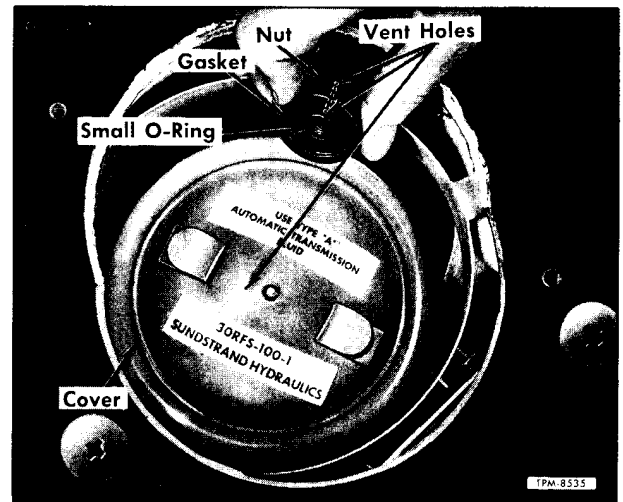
Vent Hole Locations in Reservoir Cover and Nut
